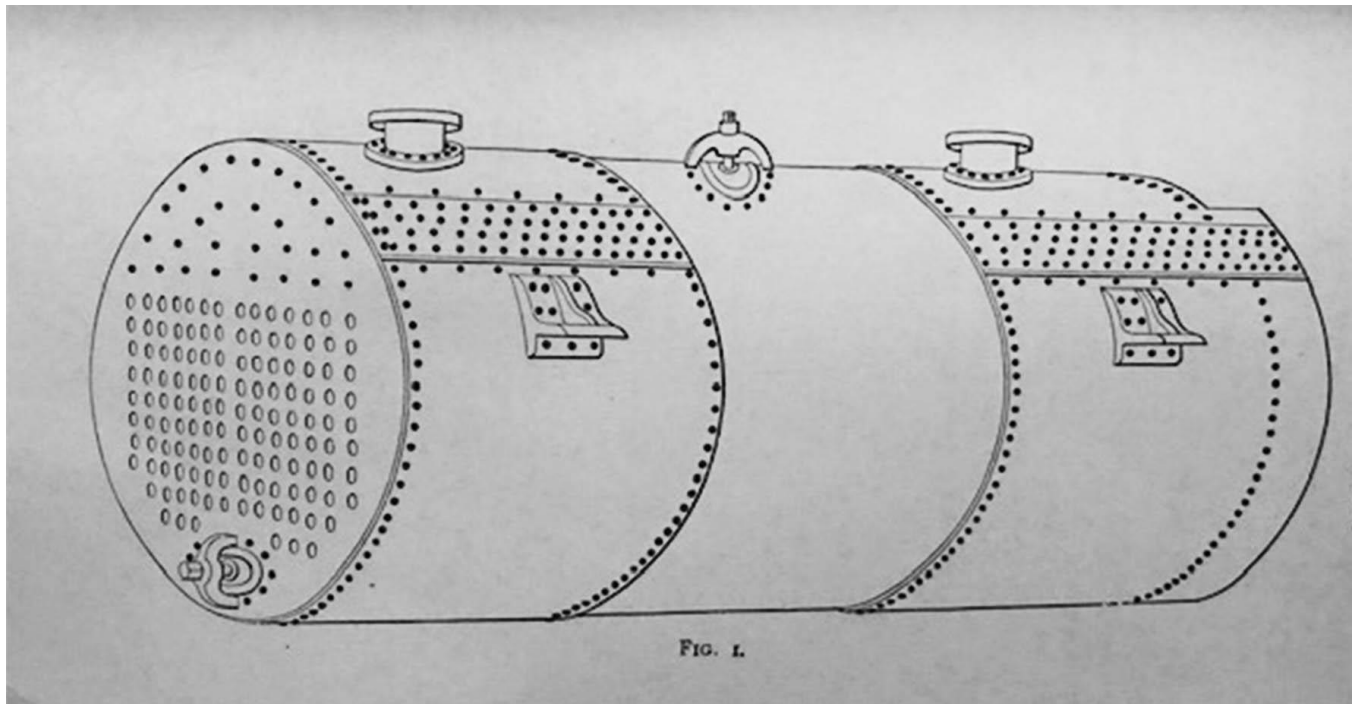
Cylindrical Tubular Boiler (Peabody and Miller 1910:3).
